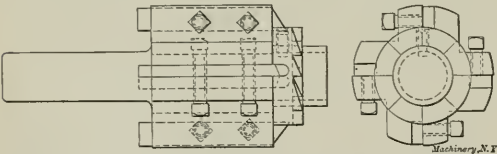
Combination Counterbore and Countersink with Inserted Blades.
